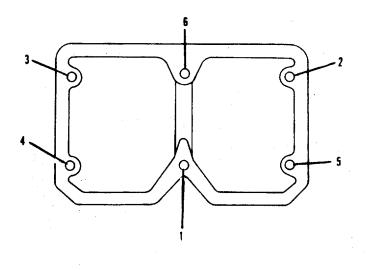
Rocker Lever Housing Torque Sequence.
